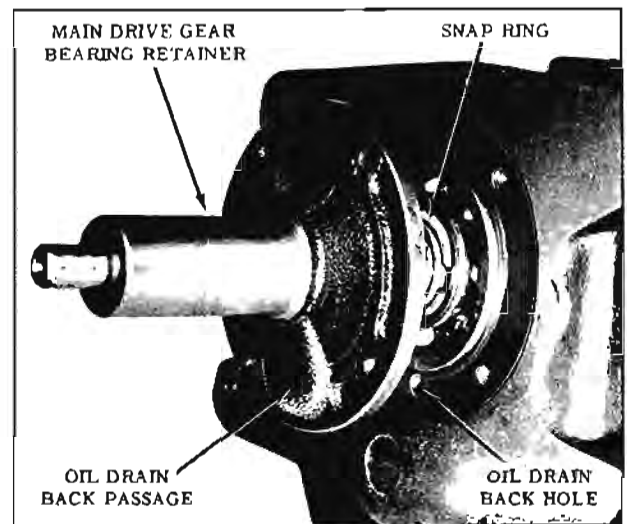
Main Drive Gear Bearing Retainer Removal
